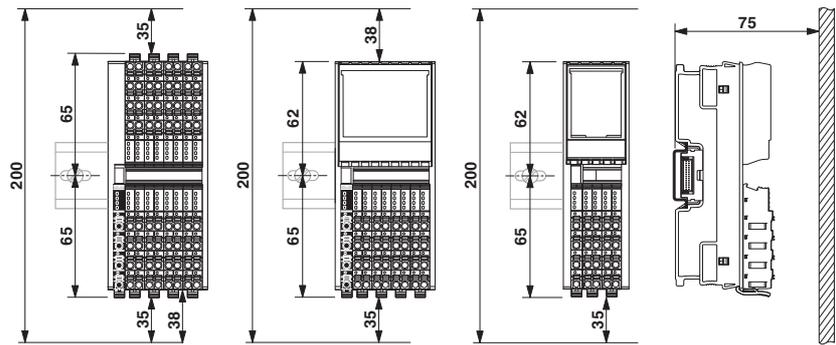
Mounting distances: I/O modules (dimensions rounded)
